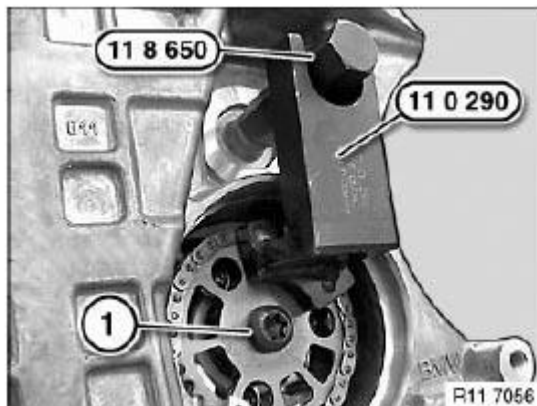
Identifying Screw With Special Tool (11 8 650) And (11 0 290)
